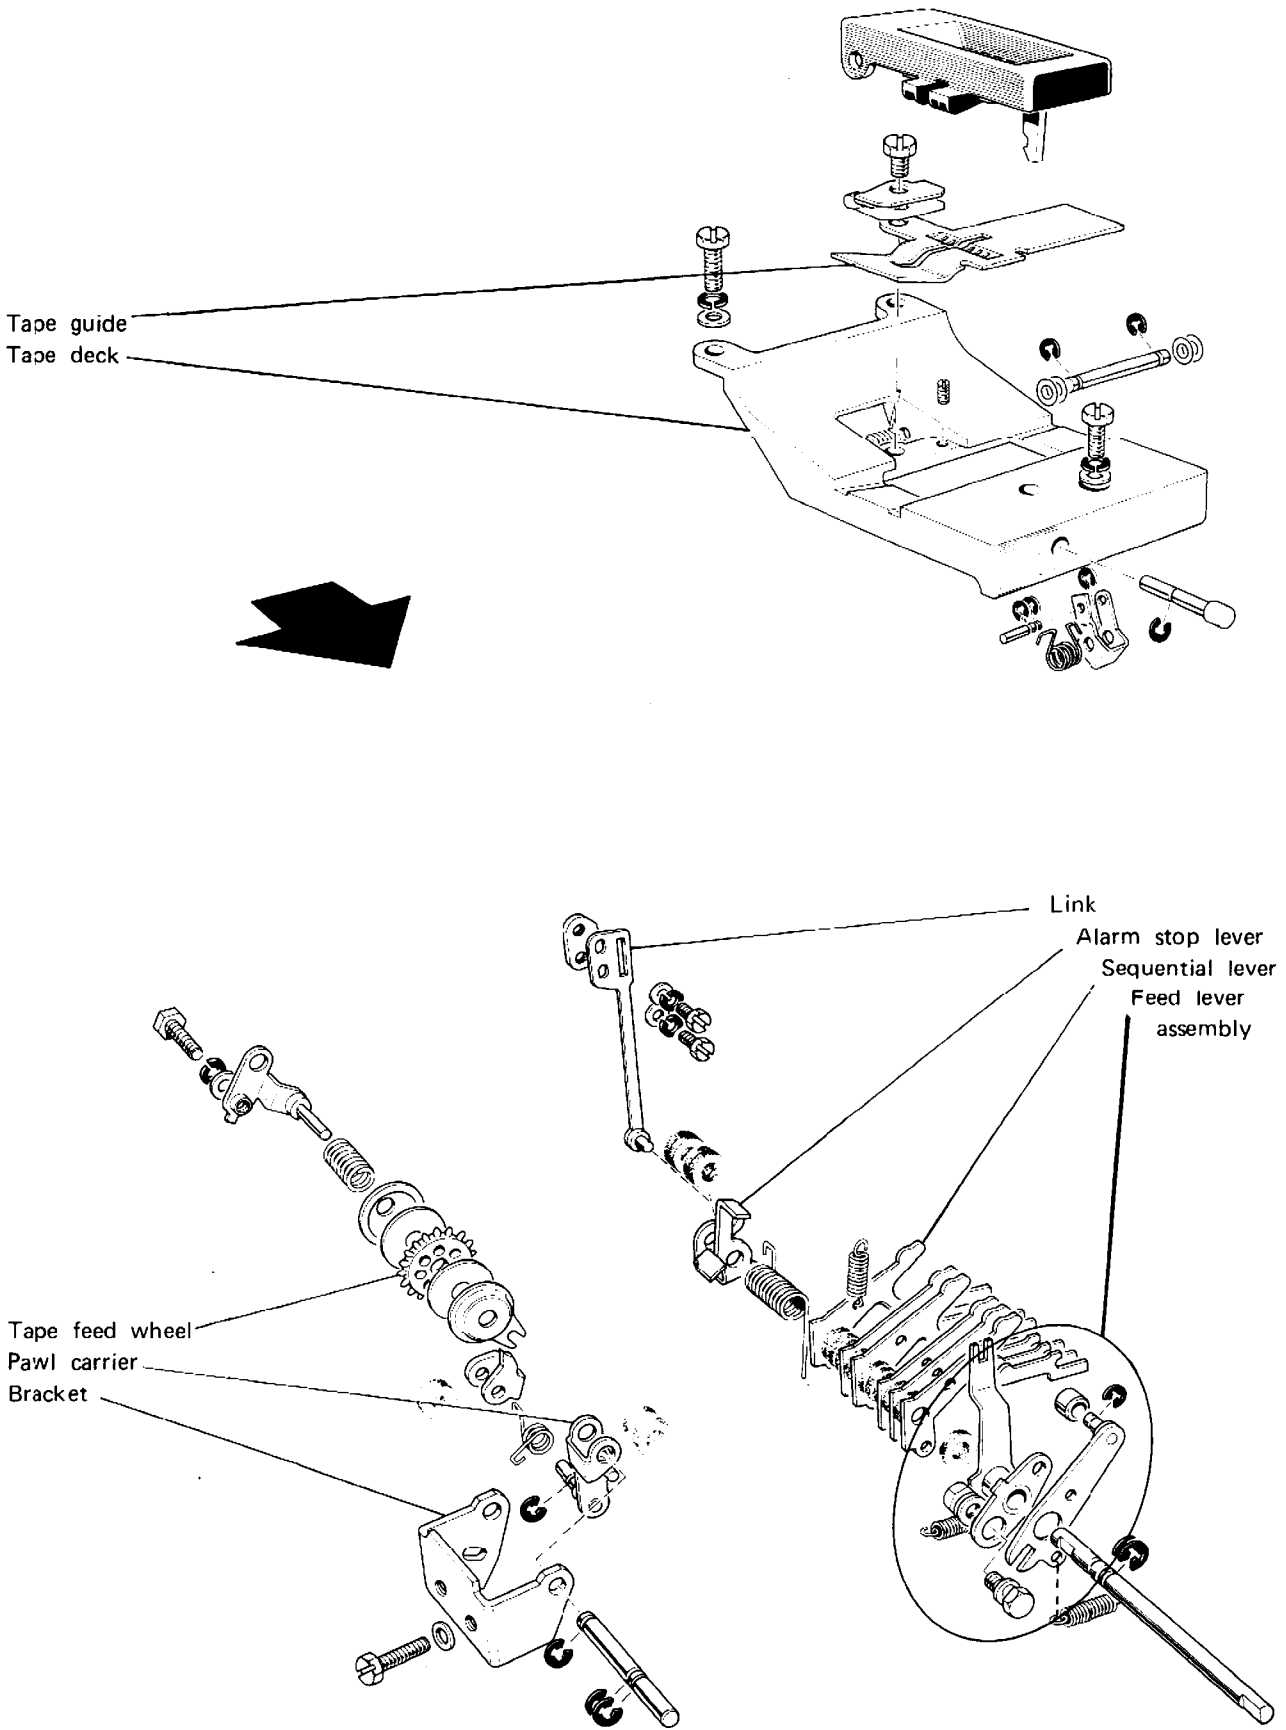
TAPE READER TAPE DECK, FEED WHEEL AND SEQUENTIAL SHAFT ASSEMBLIES
